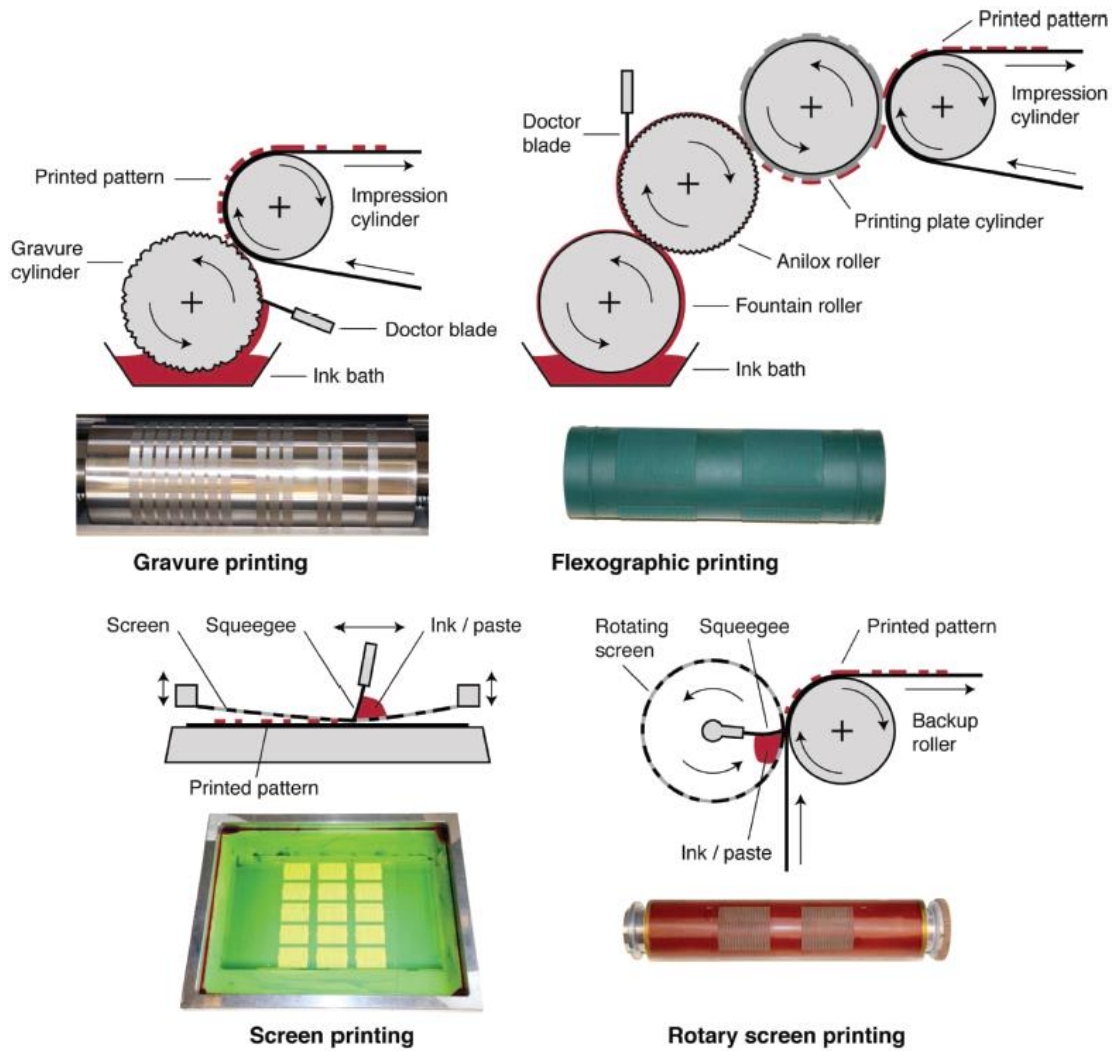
Schematic illustration of printing techniques with permanent printing forms, namely gravure printing, flexographic printing, and screen printing in flatbed or rotary design. Underneath each illustration is a picture of a corresponding printing form.⁹¹
